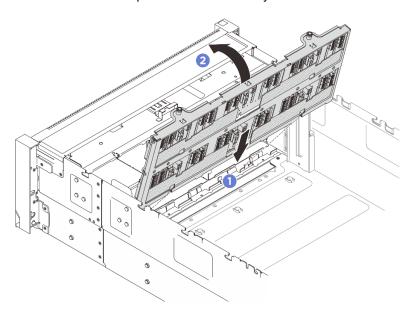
Installing drive backplane carrier assembly (2.5-inch bay chassis)
